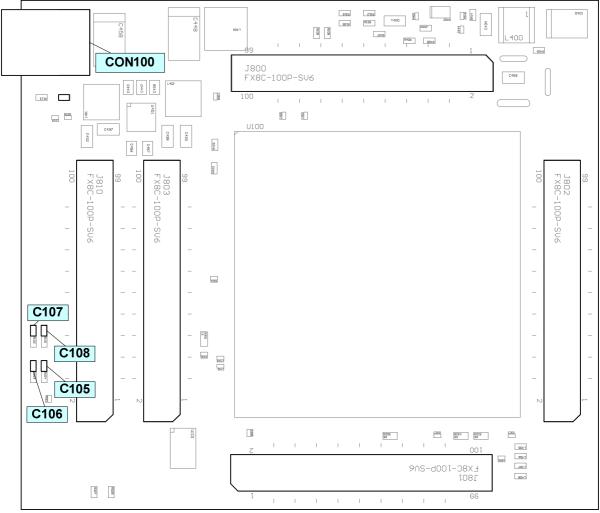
Location of parts for APIX access via interface cable (EMA-MB91FV460B-001 bottom layer)
